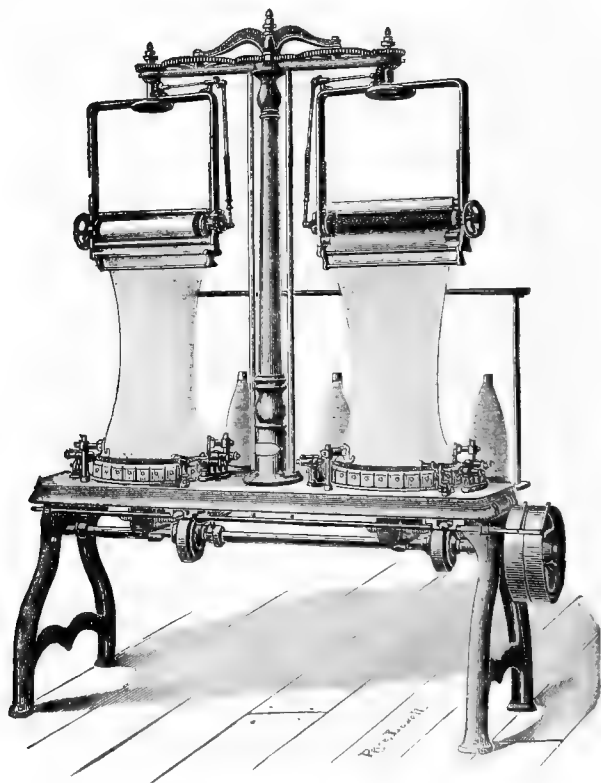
Spring-needle circular knitting machine. (J. S. Crane & Co.)
